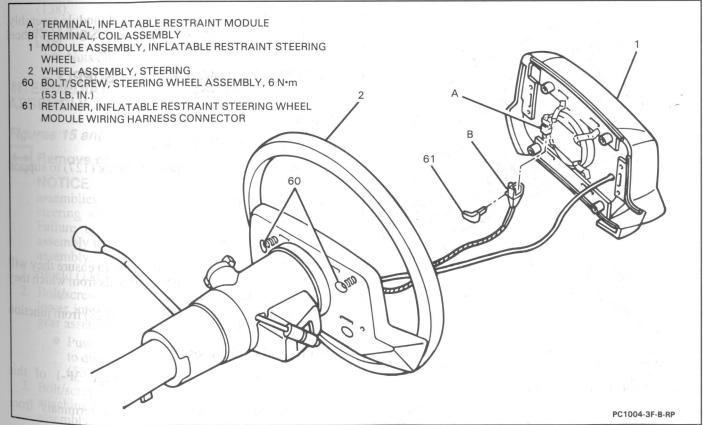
Removing Inflatable Restraint Steering Wheel Module Assembly
